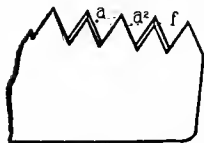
Shape of Hand or Crosscut Saw Teeth
